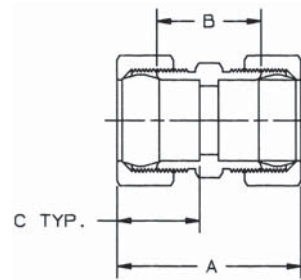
Dimensions — Weight — Packaging — Price
